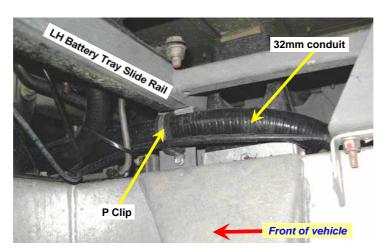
First Attachment Point on the Top of the Left-hand Chassis Rail
